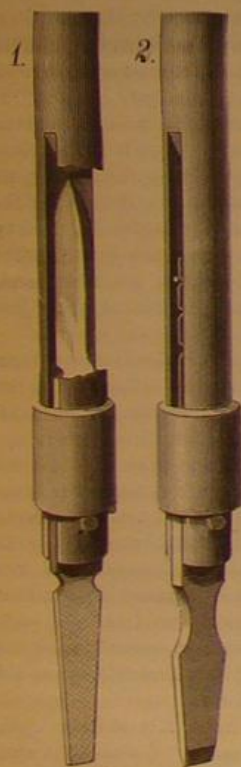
shows a bit of steel having on one end a pen-knife and on the other a file. Fig. 2 shows a combined gimlet, bit, and screwdriver. These tools are held in position in the handle by the ferrule. When it is desired to reverse them the ferrule is moved upward on the handle.
